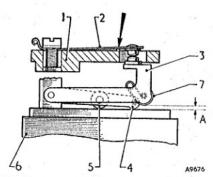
The contact gap setting on earlier-type rocker assemblies
